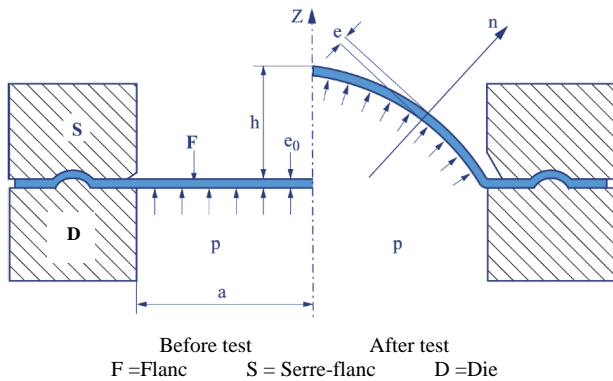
Setting up a circular expansion test: Geometry of the sheet deformed [3], [5]
